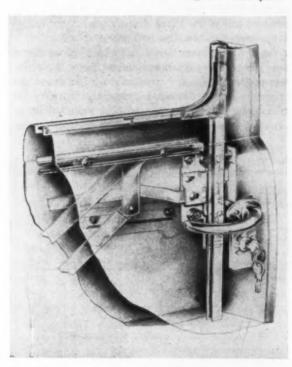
This is the same as the orthographic drawing shown in Fig. 6 except that the detail is presented by a three-dimensional, perspective-type drawing.
